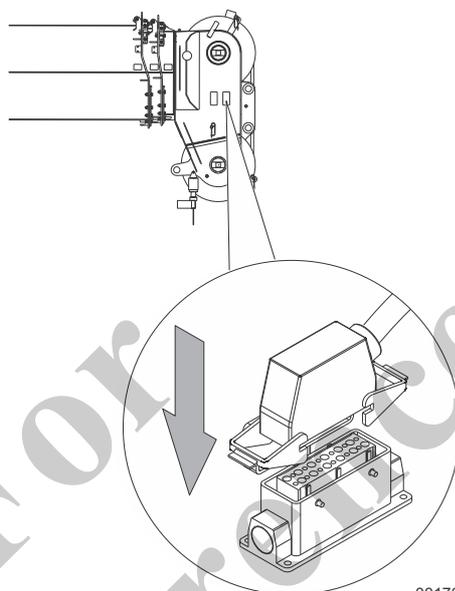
Connecting the lifting limit switch cable to the telescopic boom
